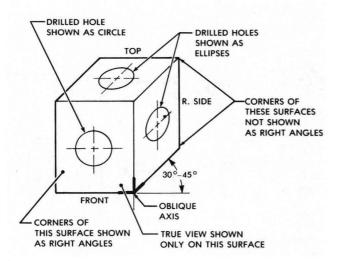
Features shown on true view surface of an oblique drawing are drawn as they appear.
